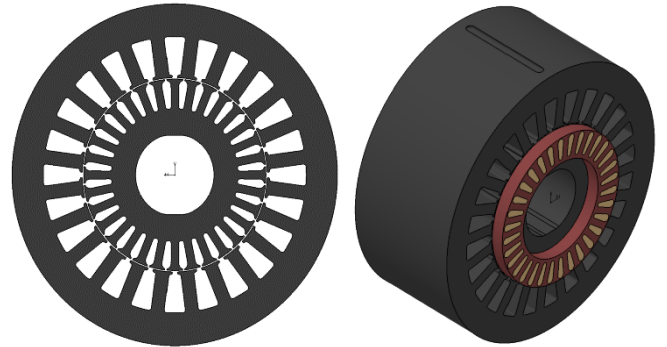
Cross-section of the high-speed induction motor with 24 stator slots and 32 rotor slots (left) and isometric view with rotor squirrel cage (right).
